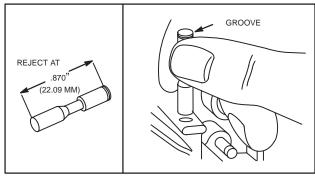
CHECKING BREAKER POINT PLUNGER HOLE
